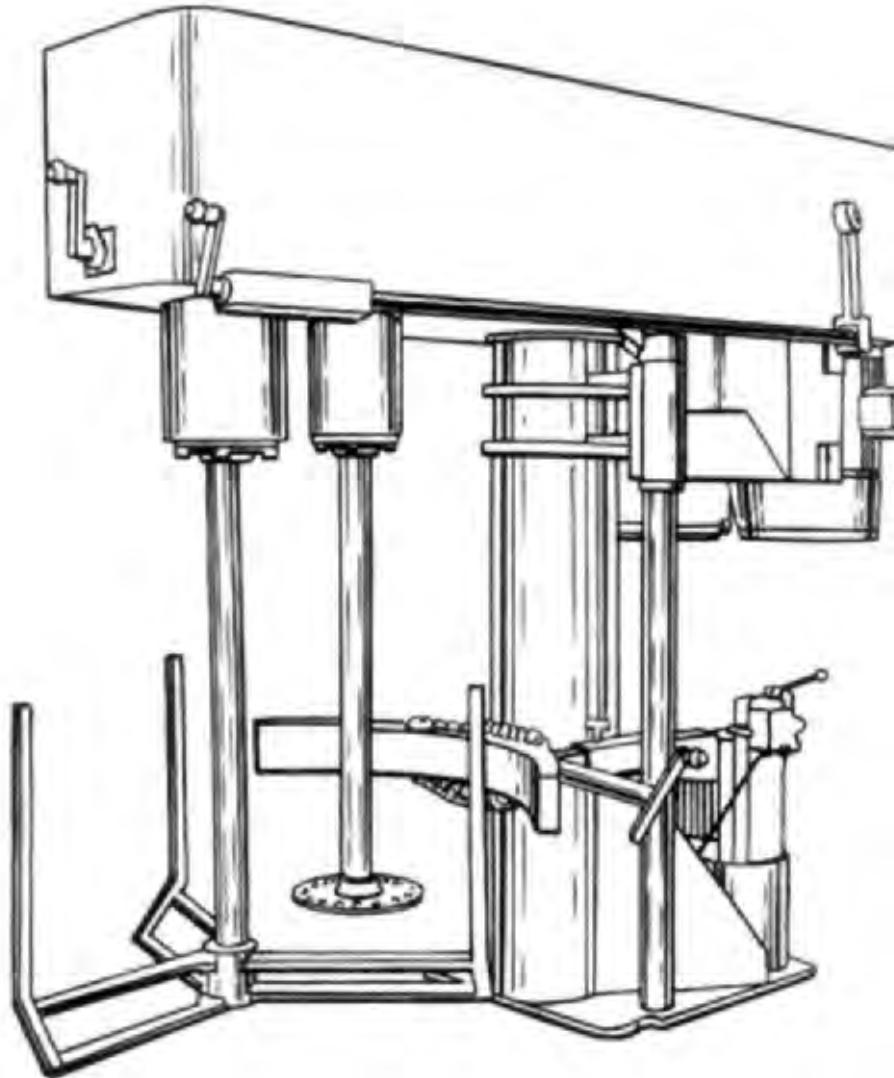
E7 A dual shaft mixer designed for solder paste. One shaft rotates at high speed and disperses the ingredients; the other shaft rotates at low speed and moves and blends the mixture. (Courtesy Myers Engineering, Inc.)
